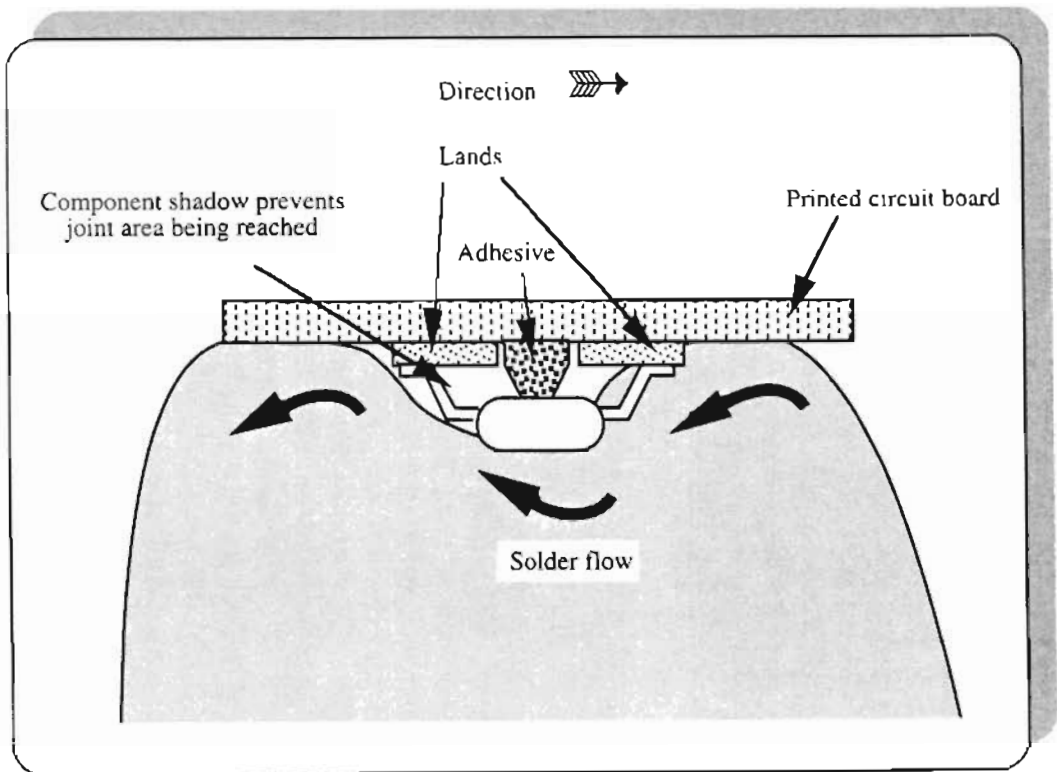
Shadow of component prevents solder wave reaching the component's own land
